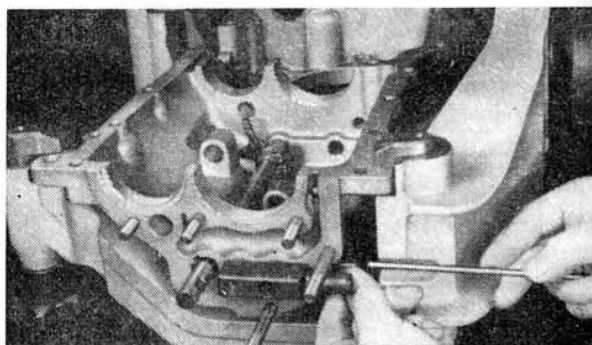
/3 - Installing Lock Pins Using MP 3-109 Jig
